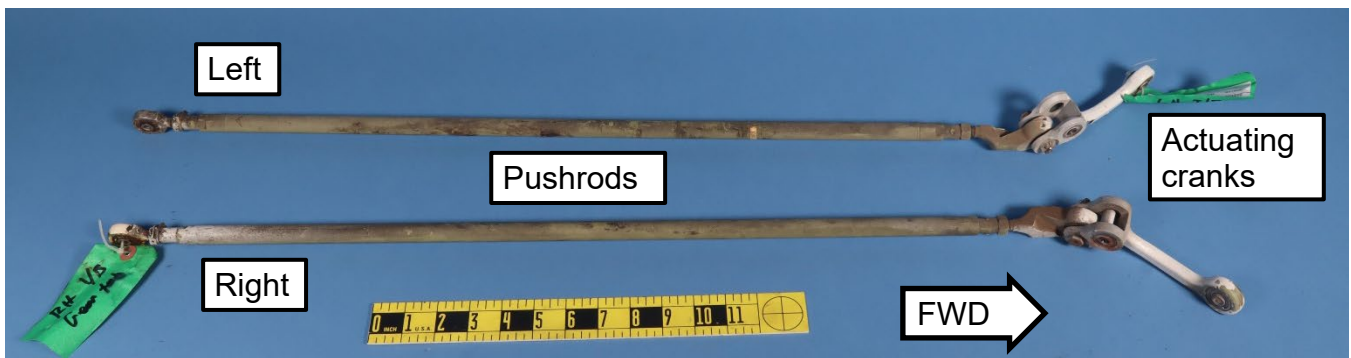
Overall view of the upper side of the submitted actuating cranks and attached pushrods.
